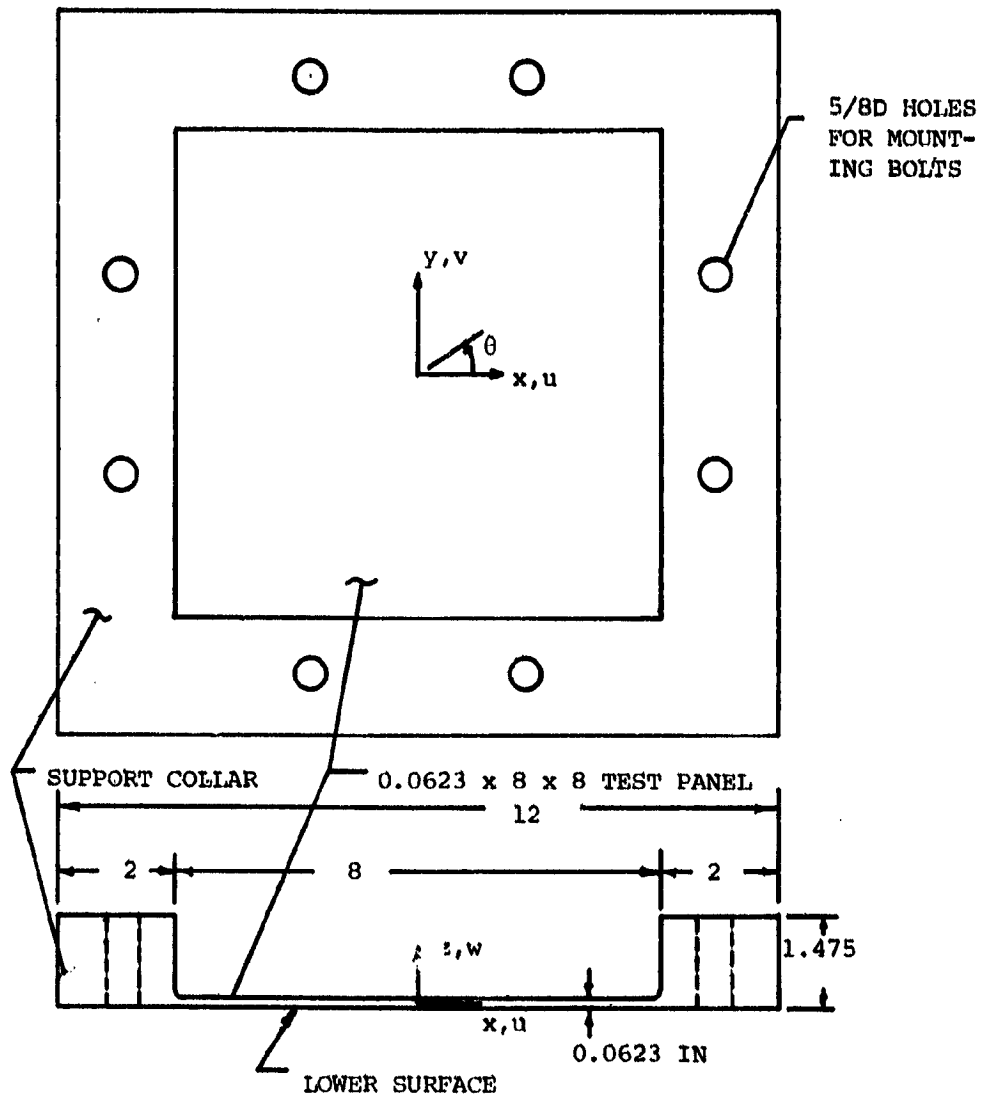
GEOMETRY AND NOMINAL DIMENSIONS OF UNIFORM-THICKNESS 6061-T651 ALUMINUM PANEL MODEL CP-2
